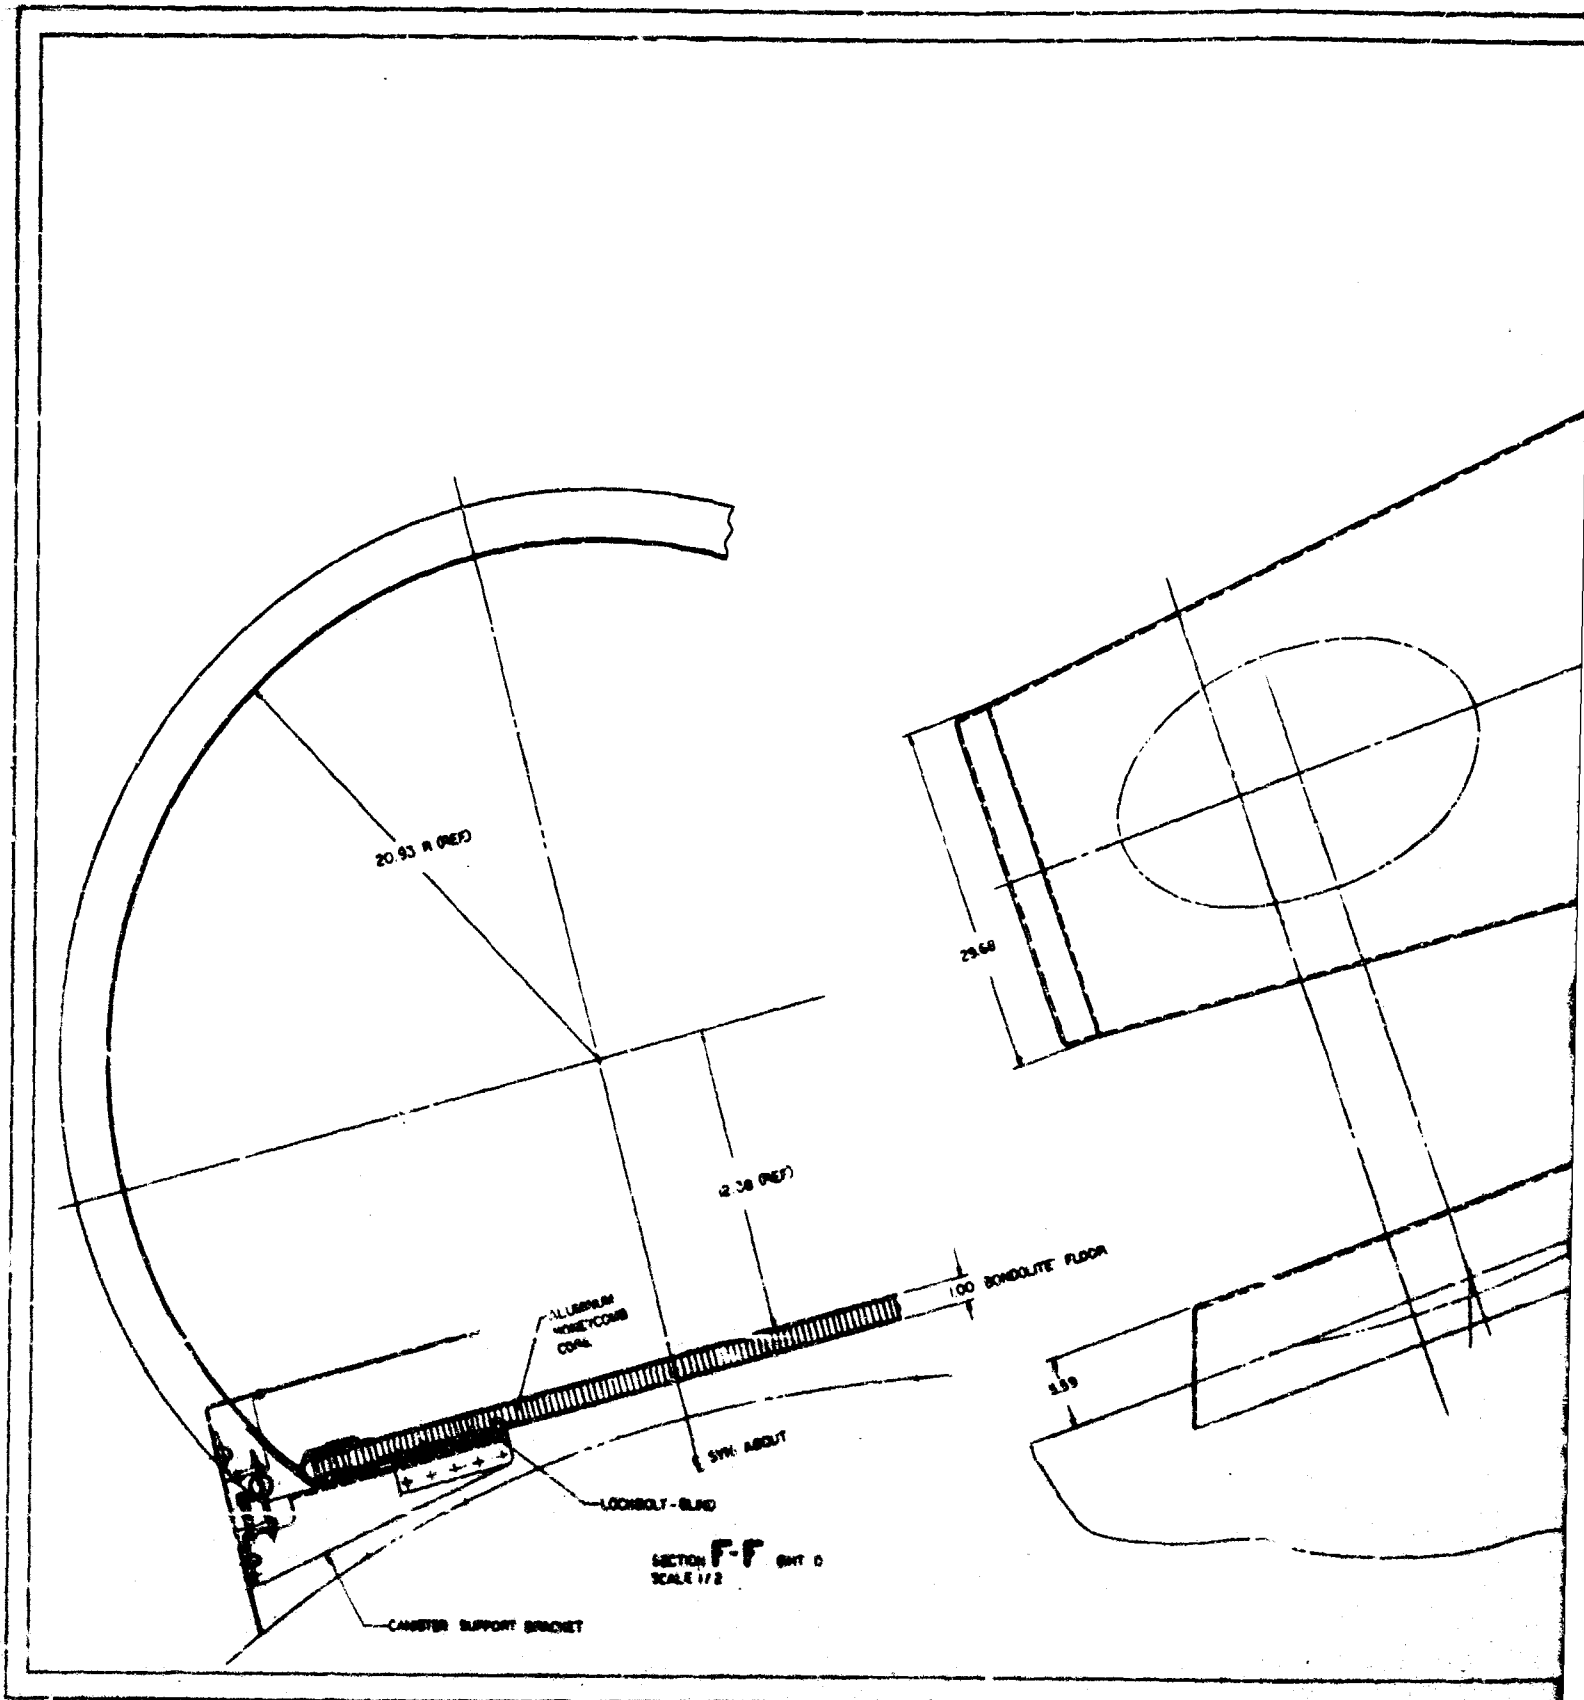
General Arrangement Drawing of Prototype Crew Transfer Tunnel (Sheet 1 of 2)
